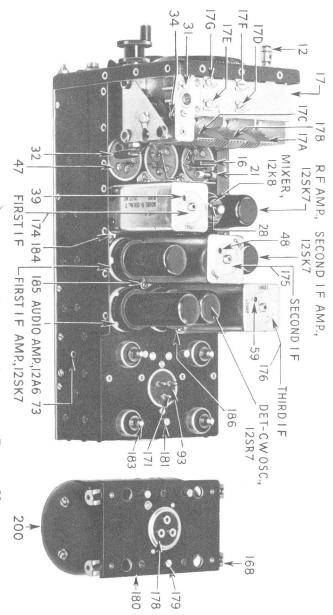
TYPICAL RECEIVER UNIT, RECEIVER DYNAMOTOR UNIT TOP VIEW, INSIDE AND BOTTOM VIEW OF
